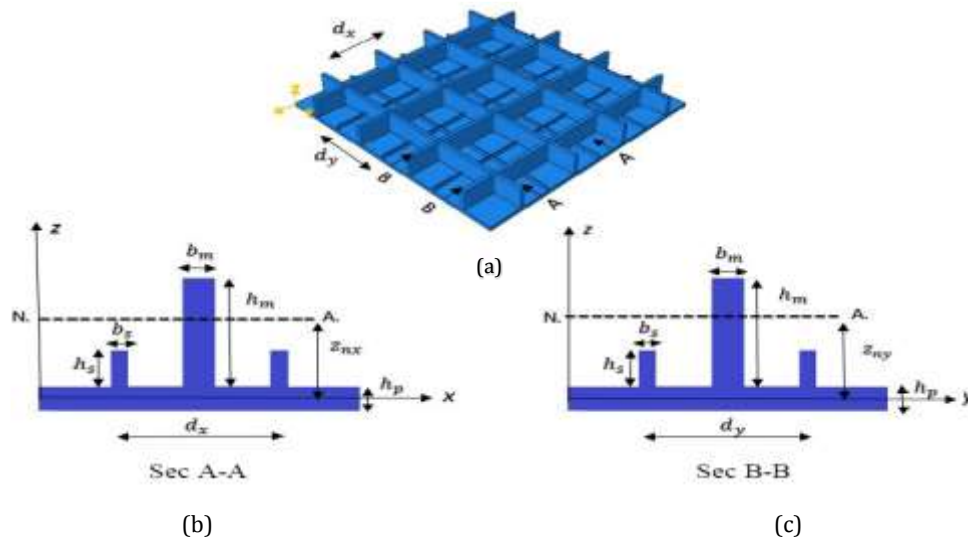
(a) details of the hierarchical stiffened panel, (b) section A-A, (c) section B-B
